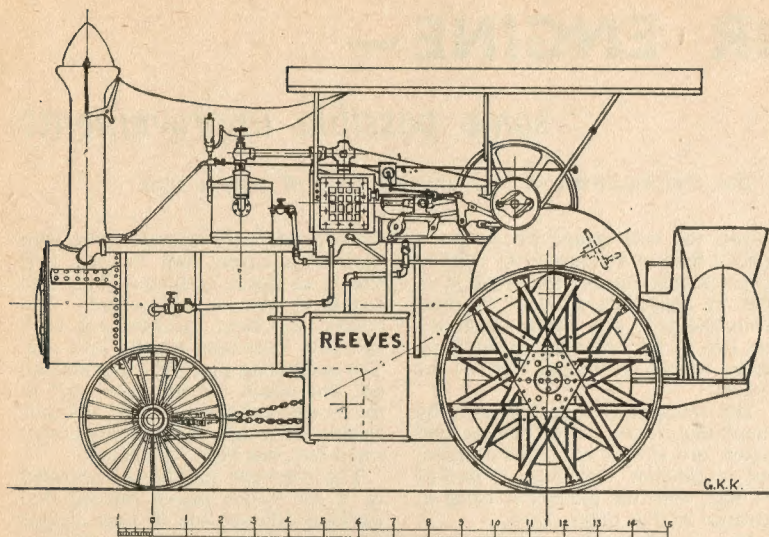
Reeves Canadian Special three-shaft rear-mounted engine. Cross-compound $8\frac{1}{2}$ in. and 14 in. bore \times 14 in. stroke. Rated 32 h.p. Circa 1916
